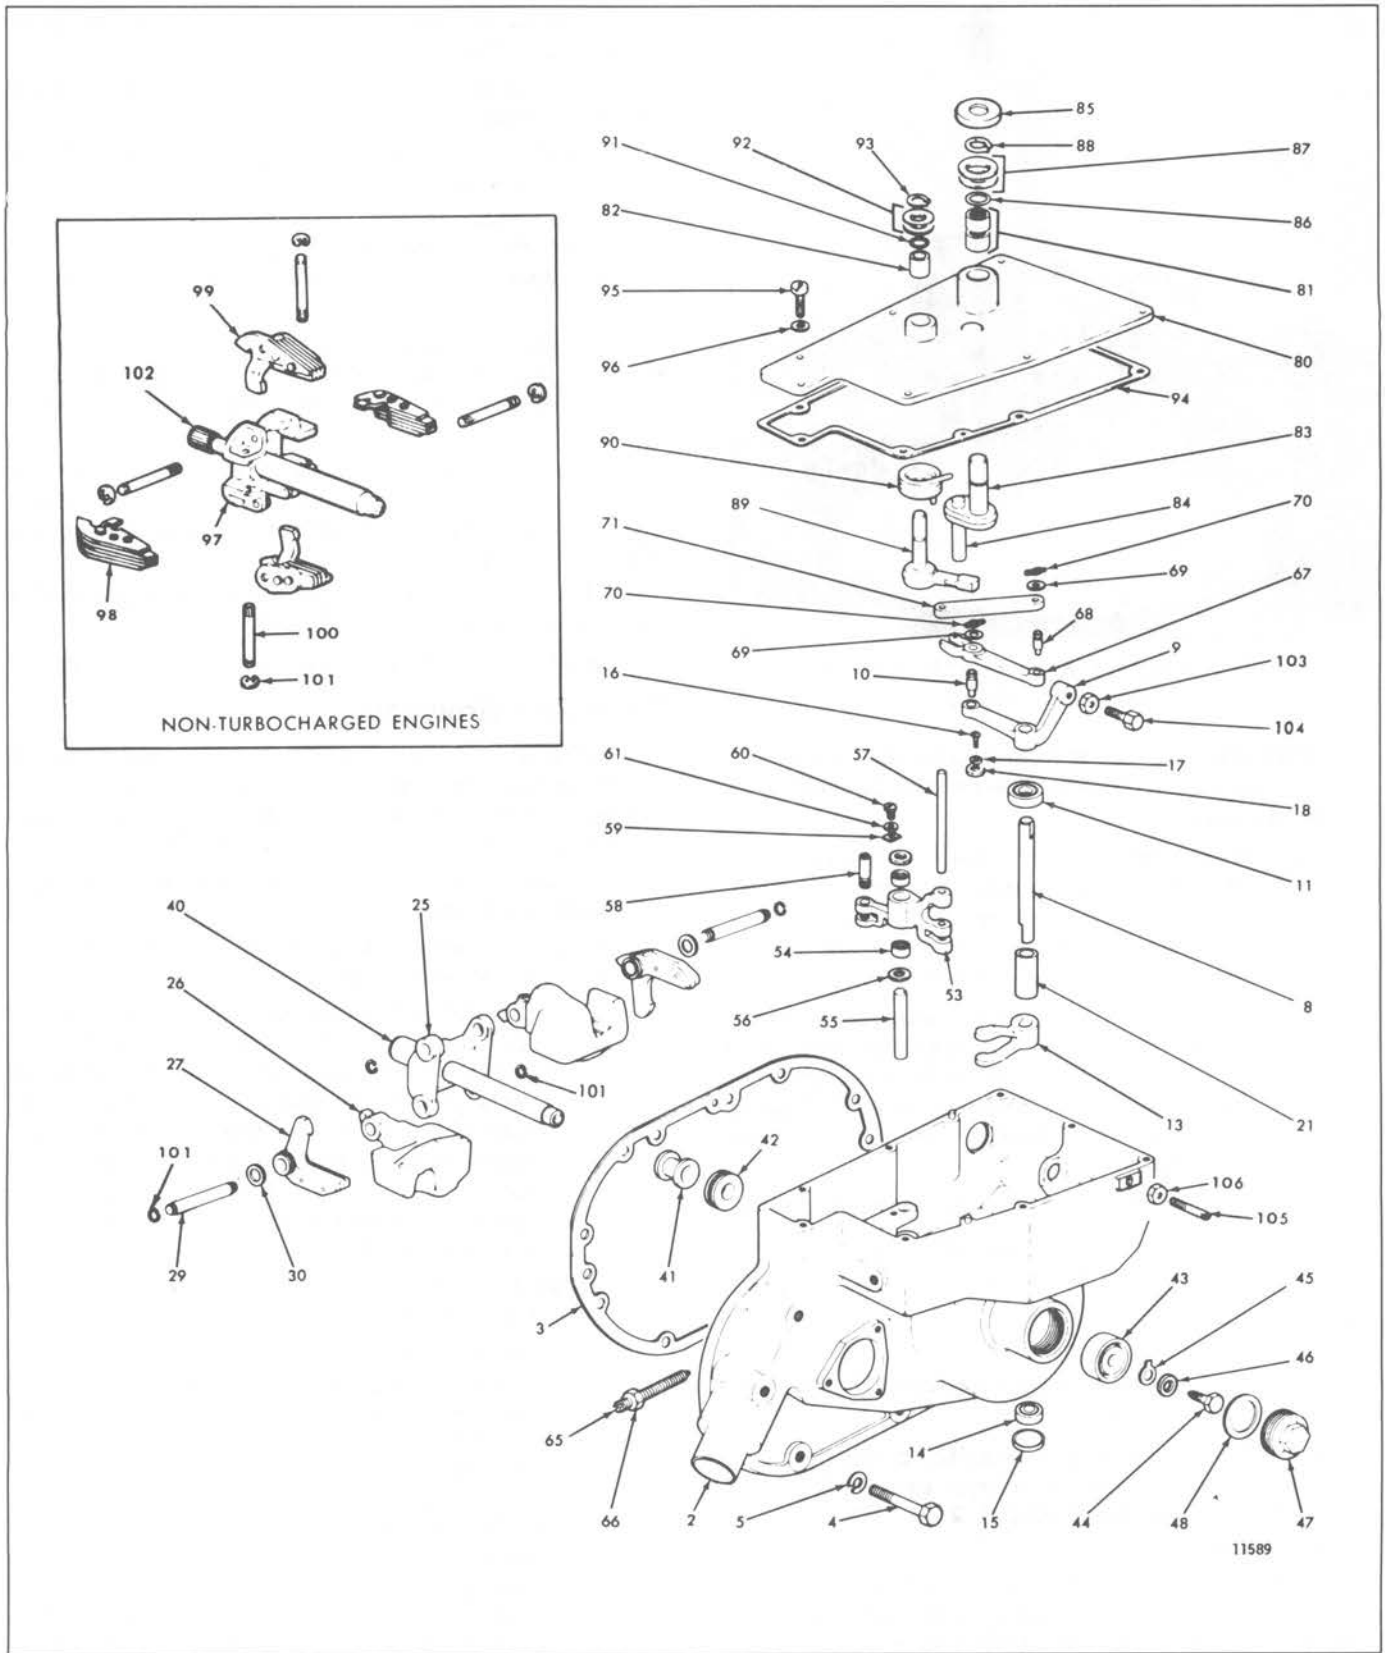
Limiting Speed Double Weight Governor Details and Relative Location of Parts
